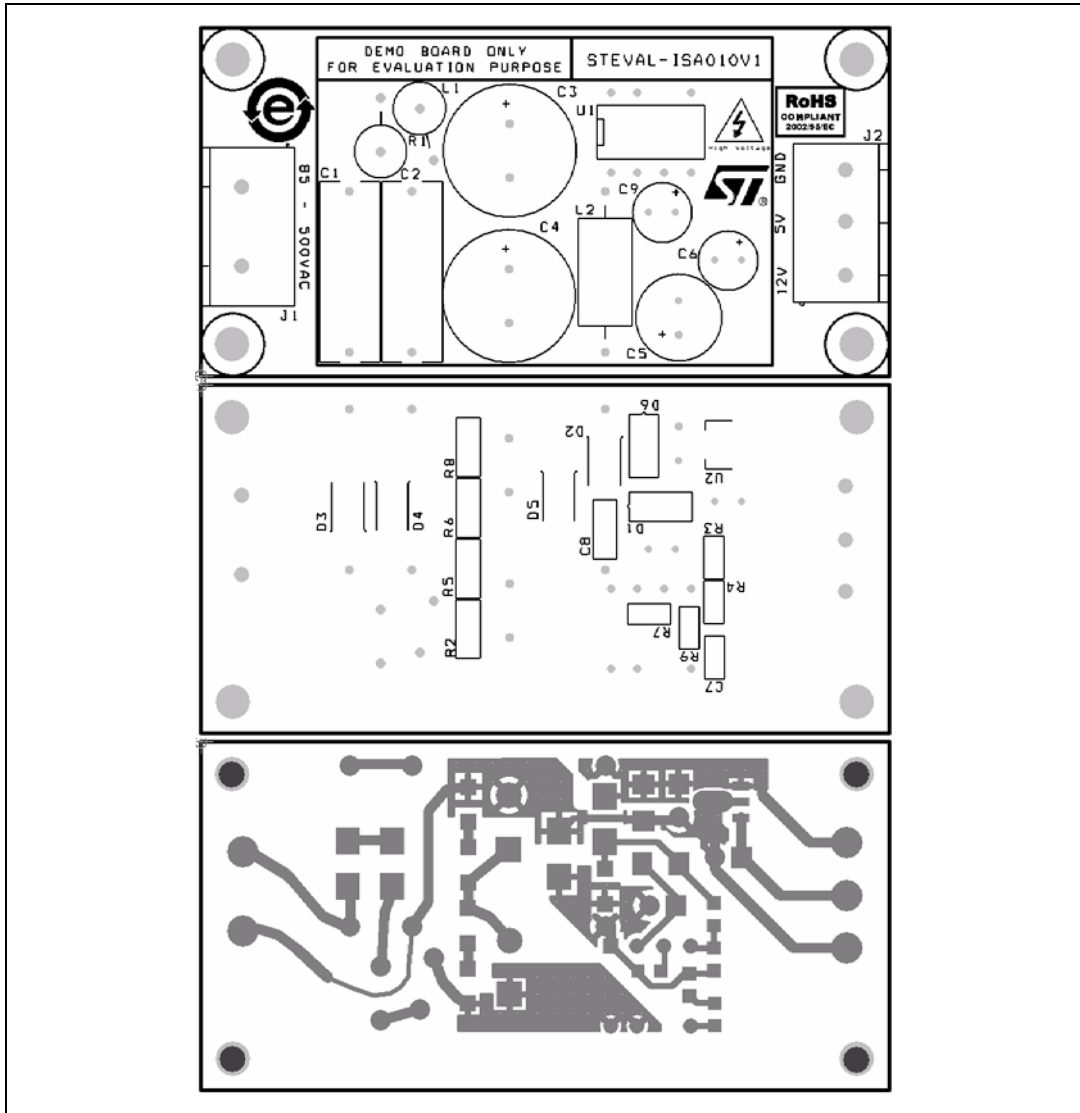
PCB layout of the buck converter (top, bottom, bottom layout)
